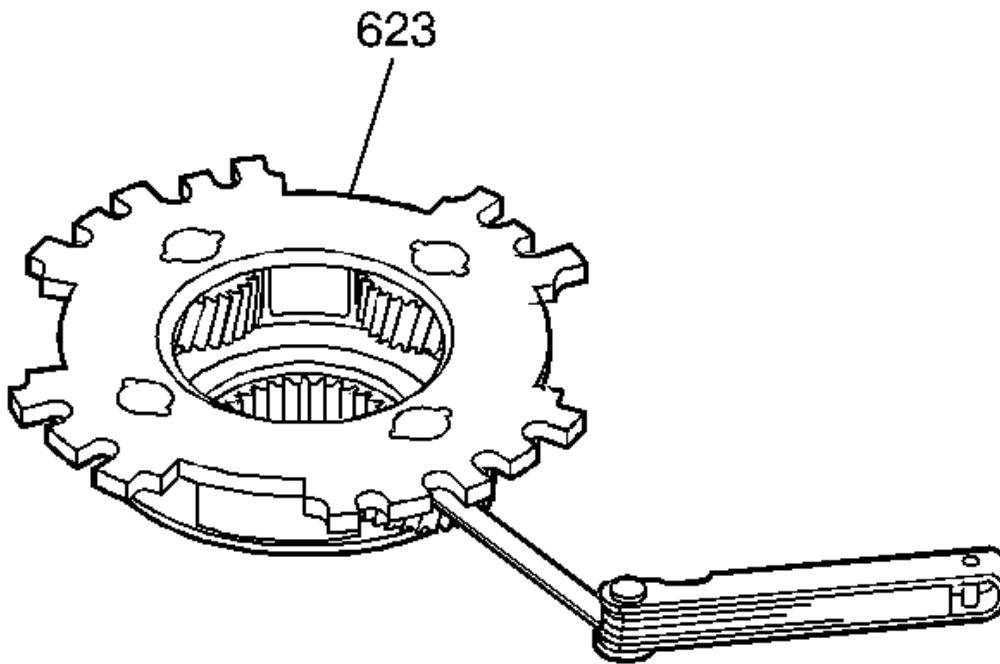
Measuring Planet Pinion End Play With Feeler Gauge
